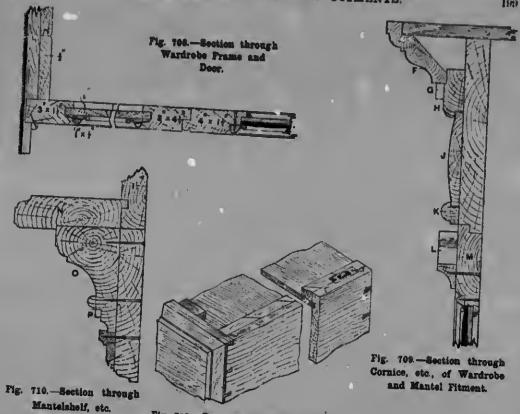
Part of Wardrobe Drawer with Friction Roller.
